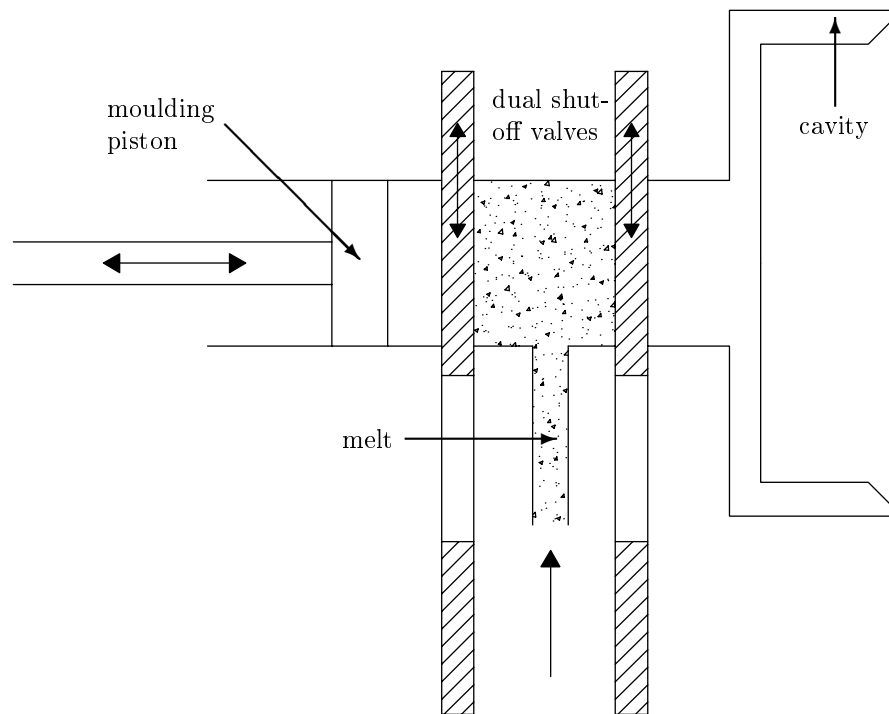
Concept 11: Inline moulding piston and dual shut-off valves
